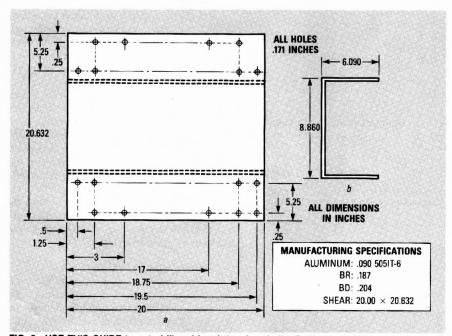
USE THIS GUIDE to cut, drill and bend the clamshells. Cutting and drilling information is provided in a; bending dimensions are shown in b.
